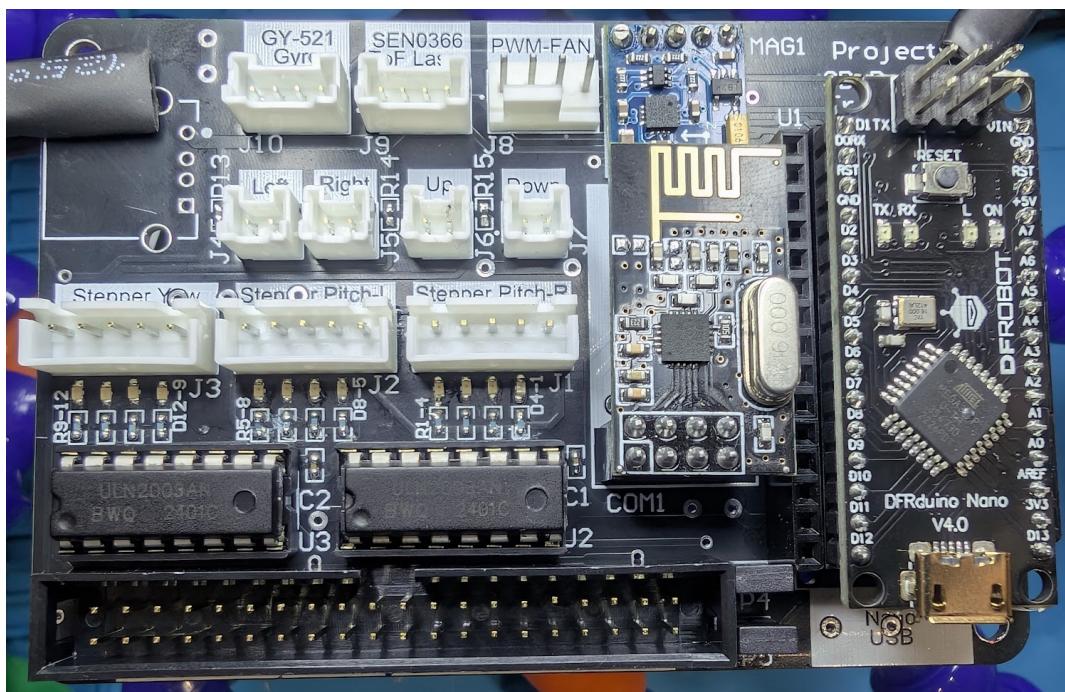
Assembled and soldered PCB with Arduino Nano [12] facing in the wrong direction
